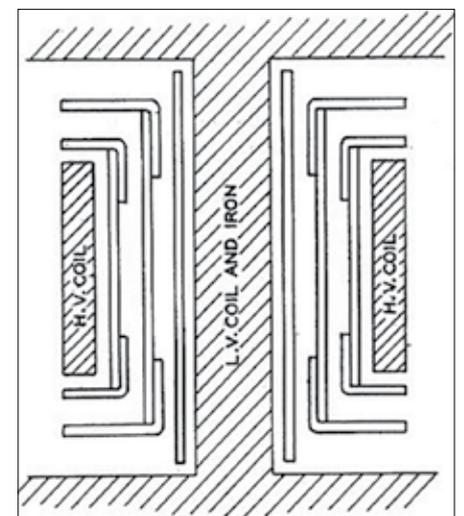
View of core type transformer insulation model [8] = Fig. 2 Vogel-1933 [8] The low-voltage coil and iron are represented as one piece
